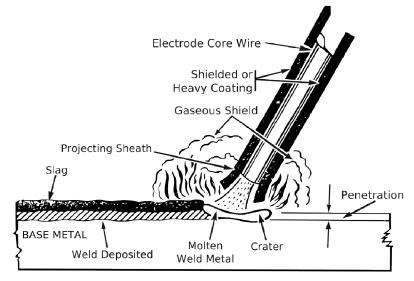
Shielded metal arc welding (SMAW)
